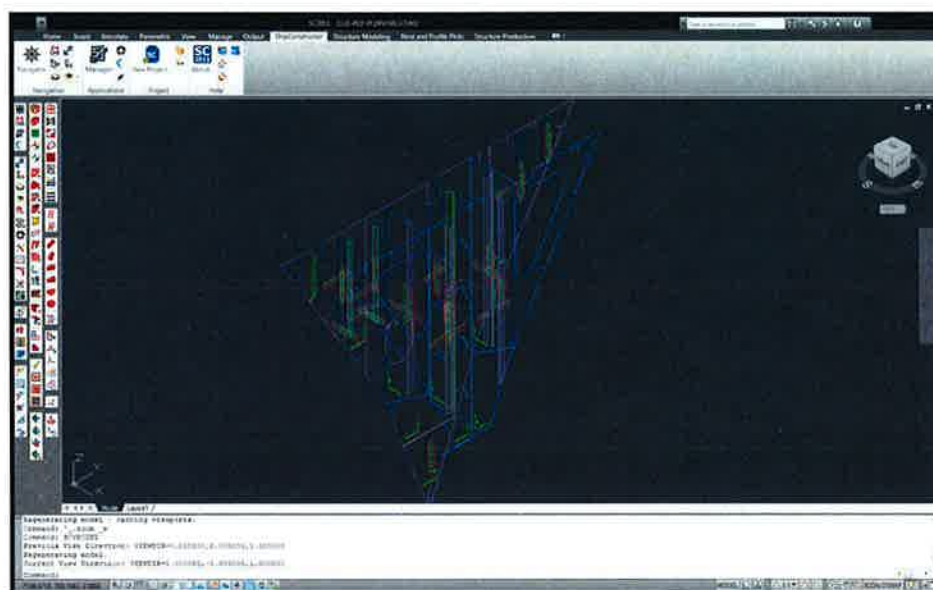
TWR 841 ShipConstructor Assembly Drawing and Interface
